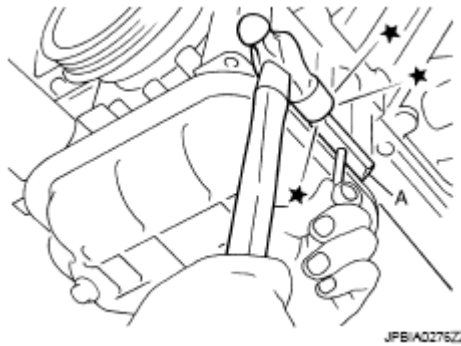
Inserting Seal Cutter Between Oil Pan (Upper) And Oil Pan (Lower)
